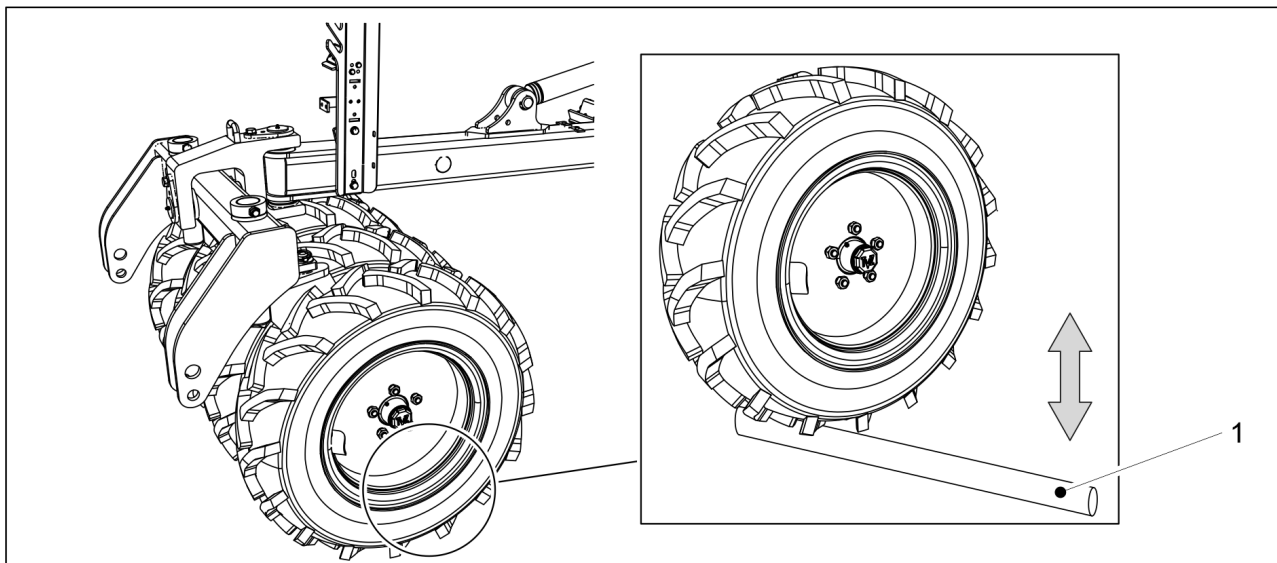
222. Checking the bearing clearance of the wheel packer hubs
